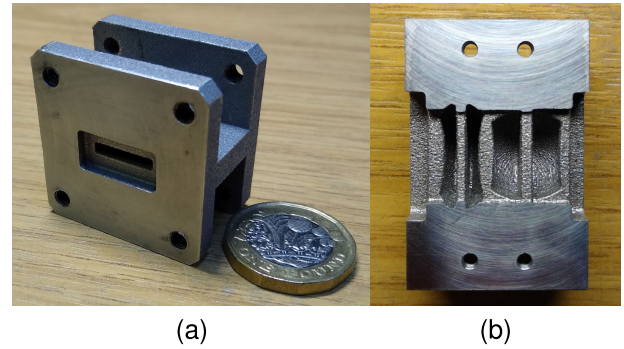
Metal 3D printed 5-pole prototype. (a) One piece perspective view with £1 coin for scale. (b) Two piece cross-section view.
